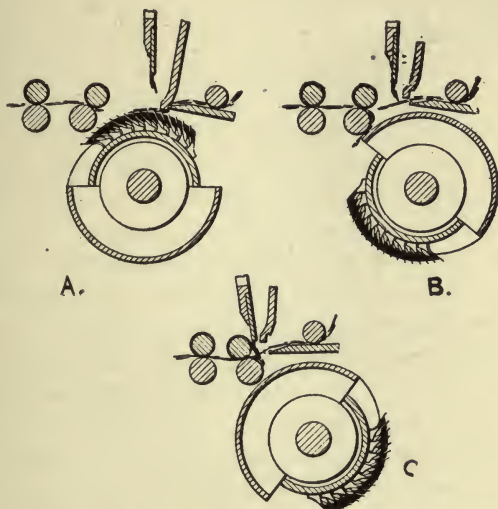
DETAIL OF COMBING MACHINE, SHOWING NIP HOLDING THE SLIVER AGAINST THE COMB.
